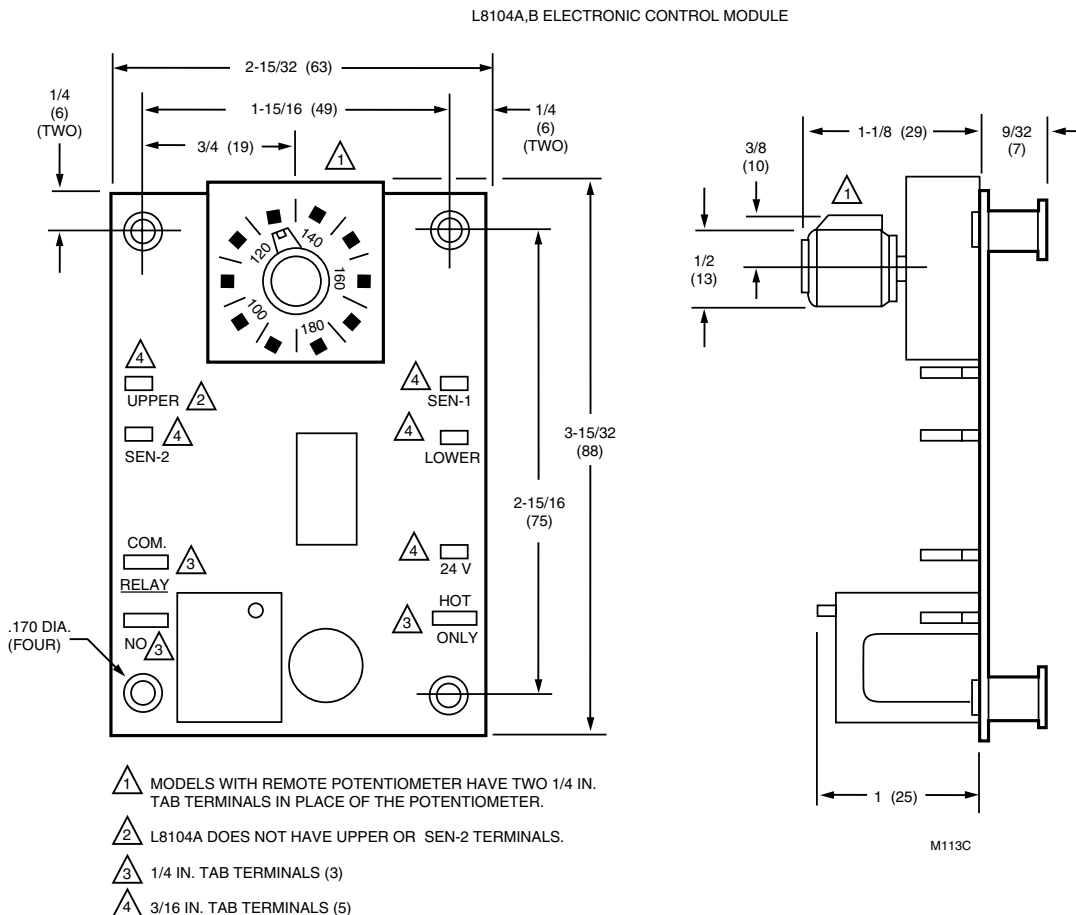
Approximate dimensions in in. (mm) of L8104A,B Electronic Control Module.
